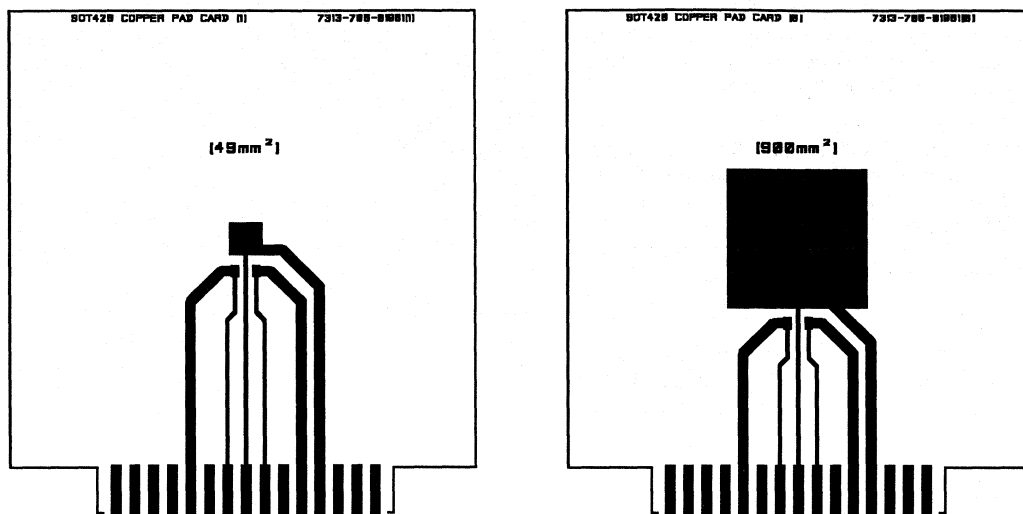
SOT223 / SOT428 test PCB layout, small and large pad areas.
